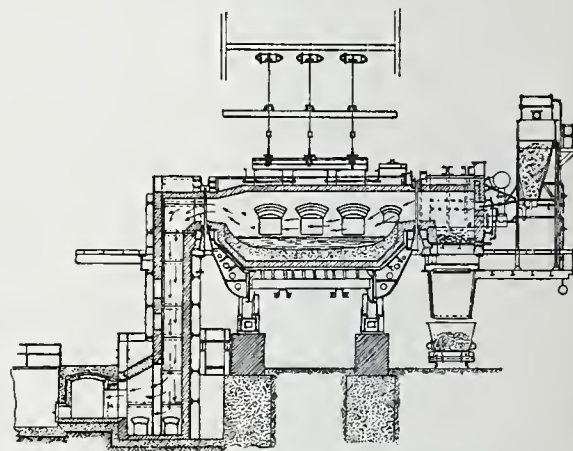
Pulverised Fuel Fired Steel-melting Tilting Furnace or Mixer.
